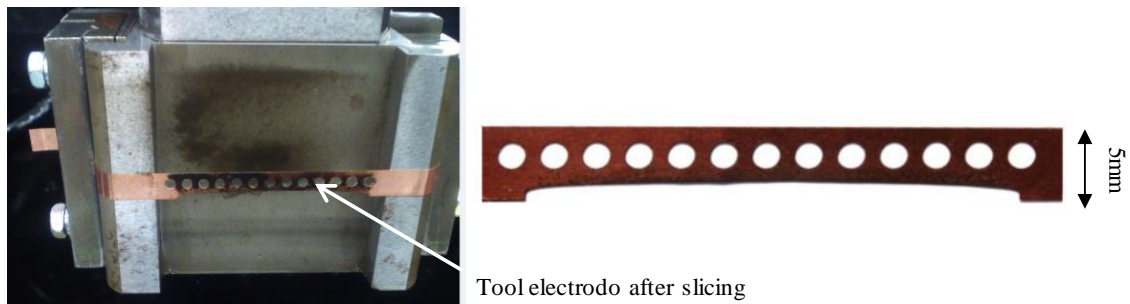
Foil tool wear in slicing of SiC with reciprocating motion.
